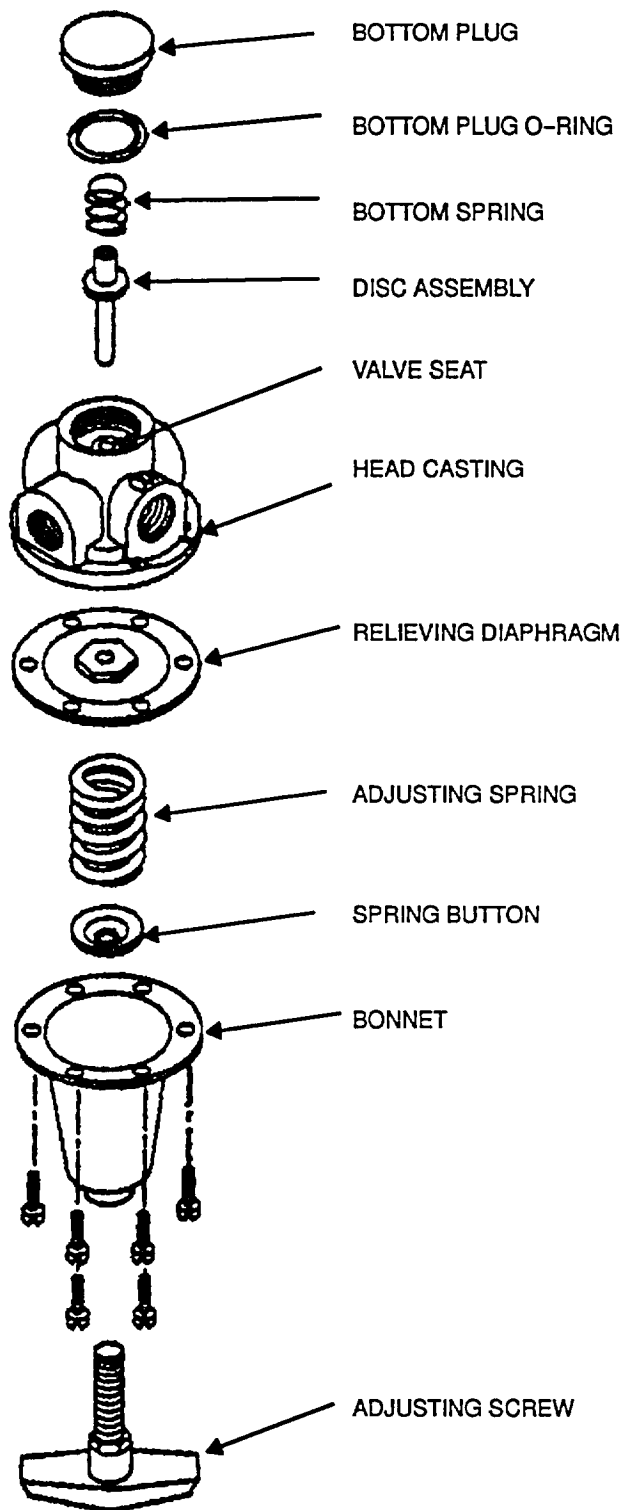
Air Pressure Regulators 1 and 2, Exploded View
